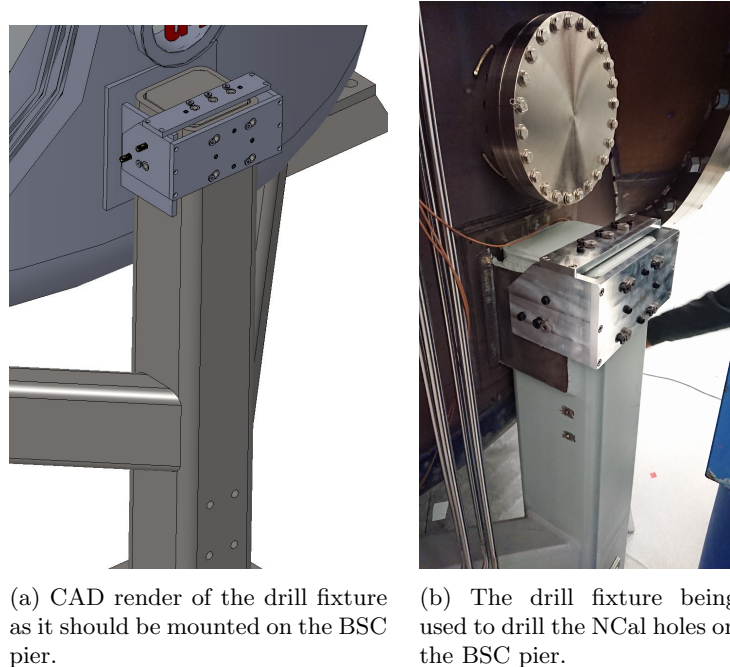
CAD render and the actual drill fixture for locating the precise location for drilling the holes for mounting the NCal on the BSC pier.
